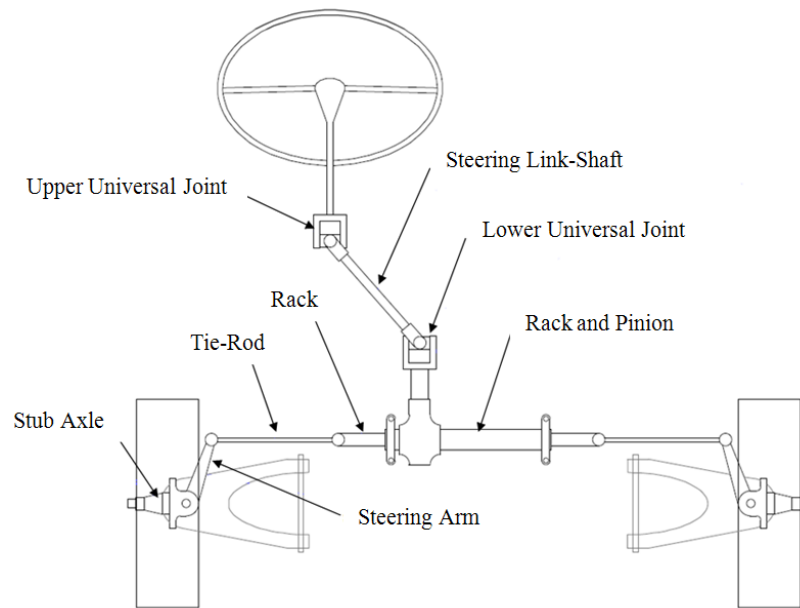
Steering Linkages with a Rack and Pinion Steering Mechanism
